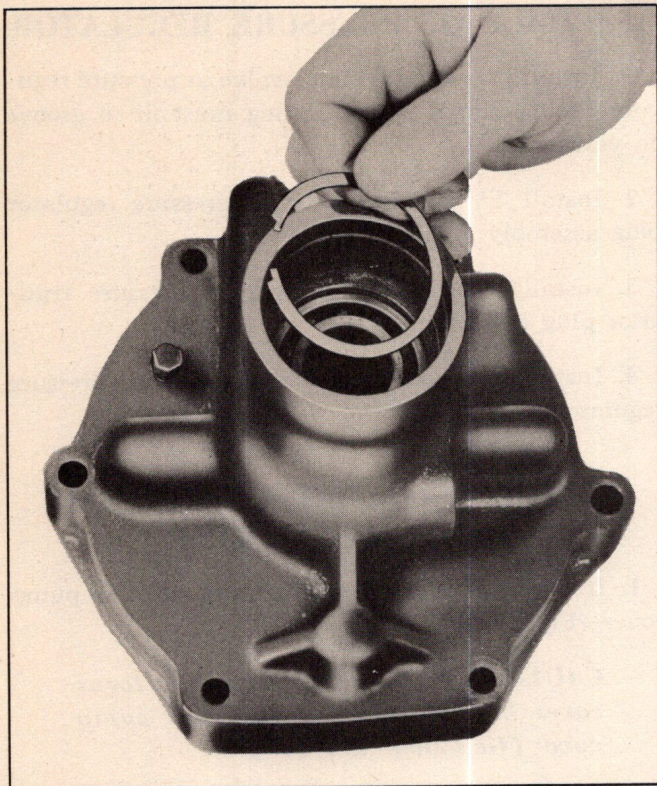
Installing Snap Ring in Rear Bearing Retainer
